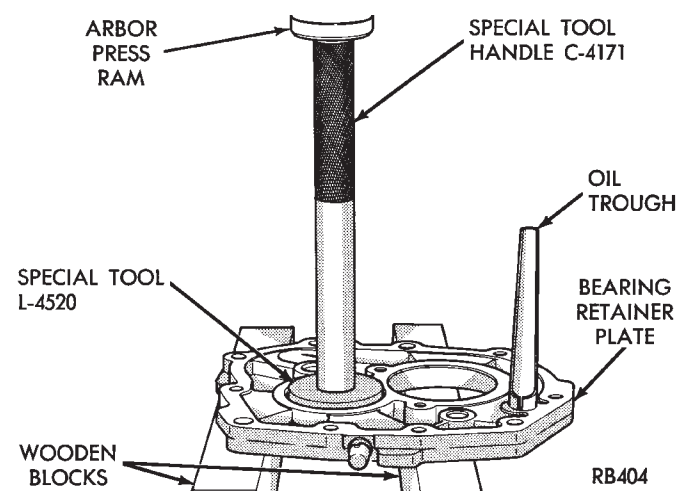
Install Input Shaft Rear Bearing Cone
